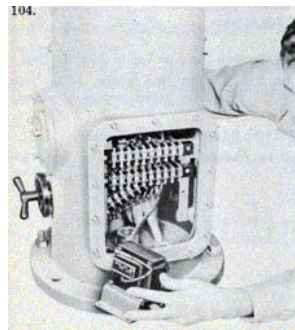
The director stand lower terminal block must be loosened and pushed to one side before the transformer can be removed.
